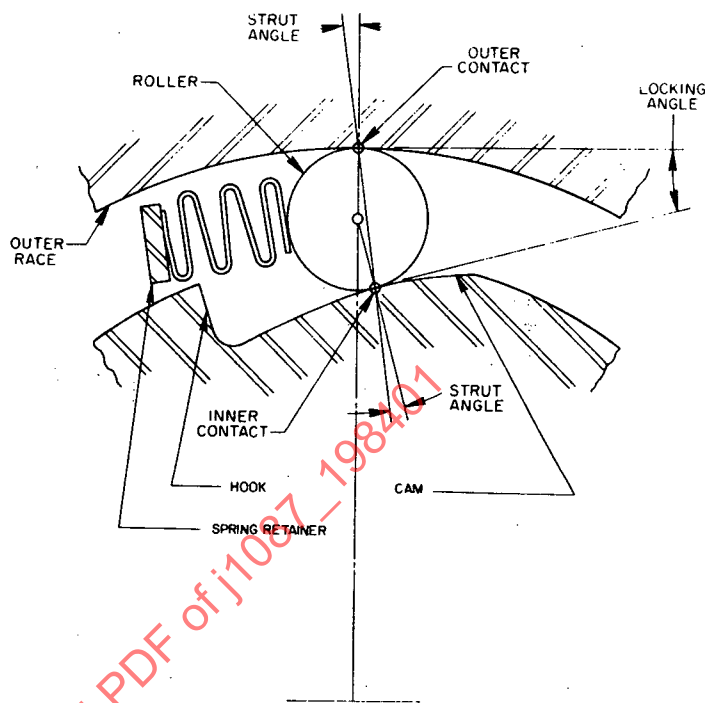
INNER CAM TYPE ROLLER ONE-WAY CLUTCH DIAGRAM
